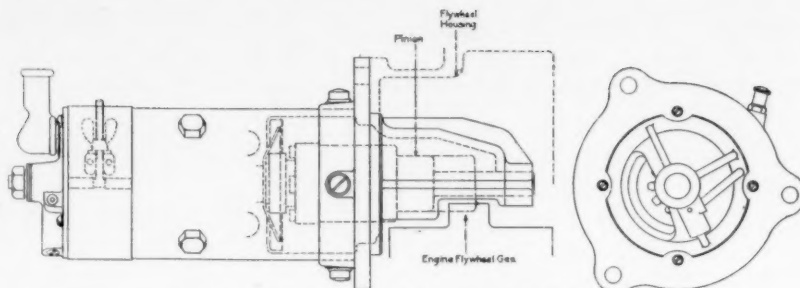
STARTING MOTOR FOR OUTBOARD SHIFT
